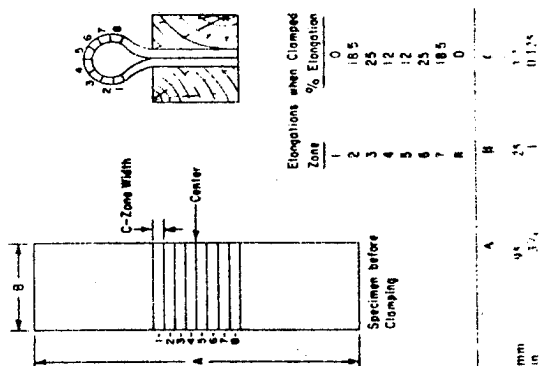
Cross-Sectional View of Mounted Looped Specimens Showing Elongation at Different Parts, Procedure B.
